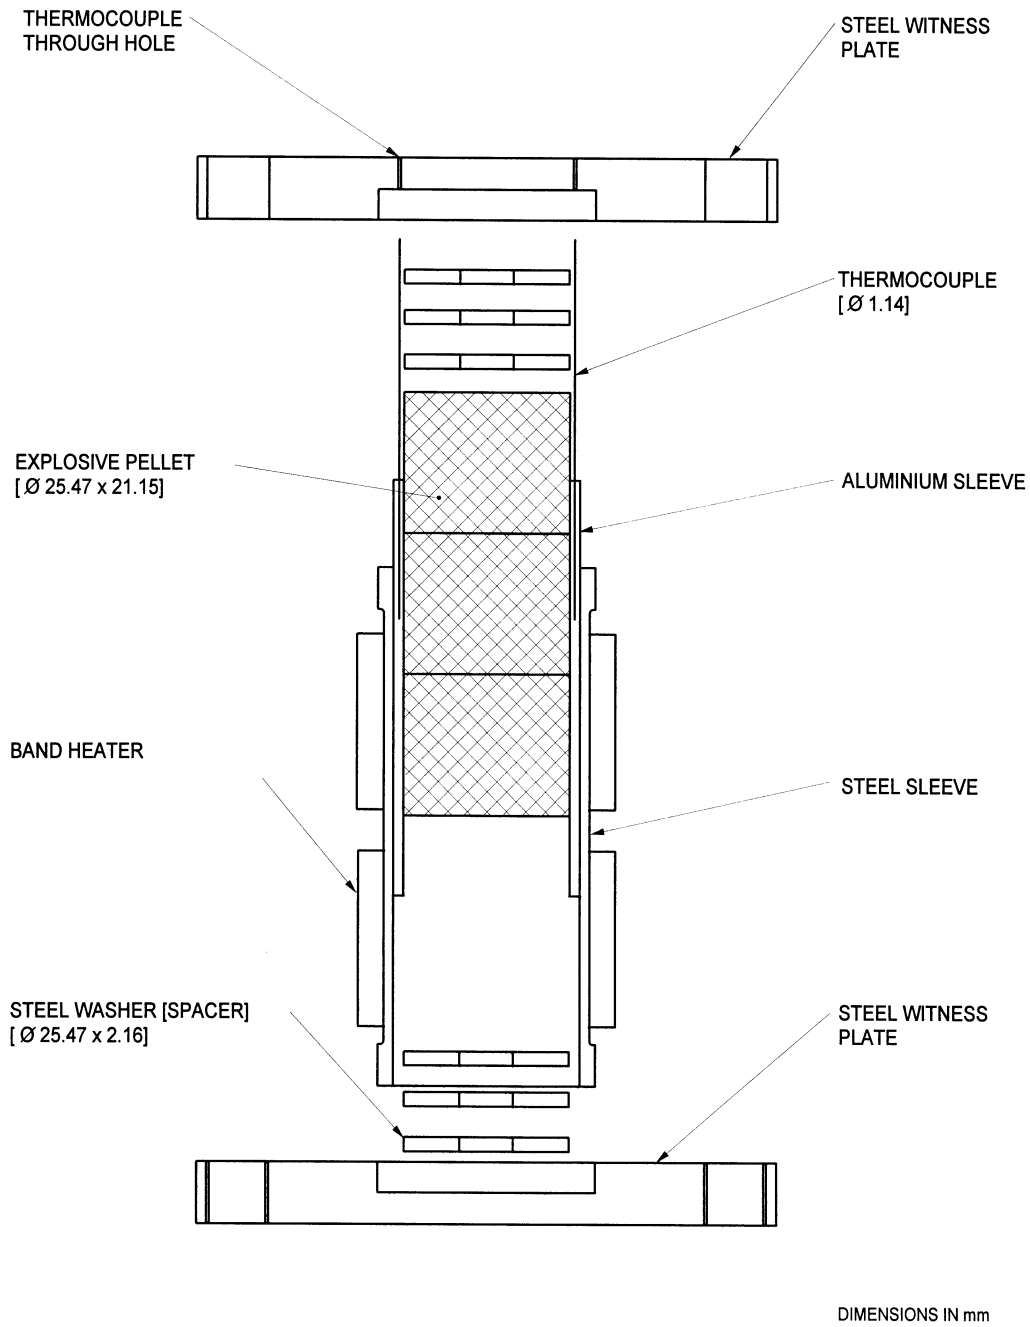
ASSEMBLY, EXPLODED VIEW
